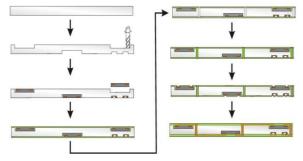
Step by Step Process for Double-Sided 3D Printed Circuit Assembly and Interconnection Without Solder.
